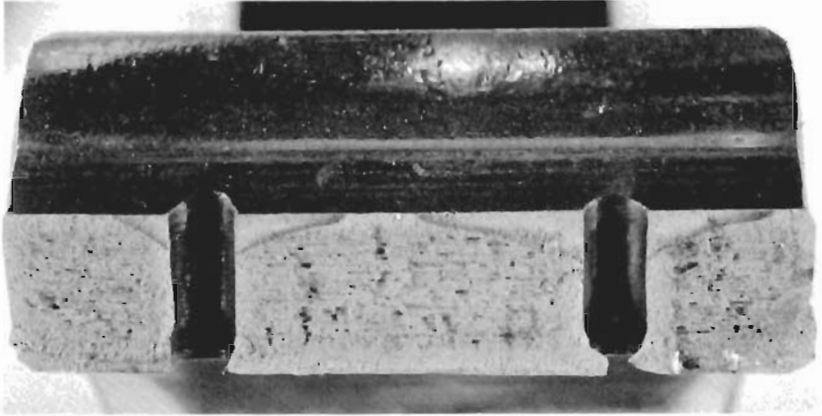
Spur idler gear, 2.7 \times . Fatigue crack origin in tooth root at oil holes. Final fracture was rapid.
